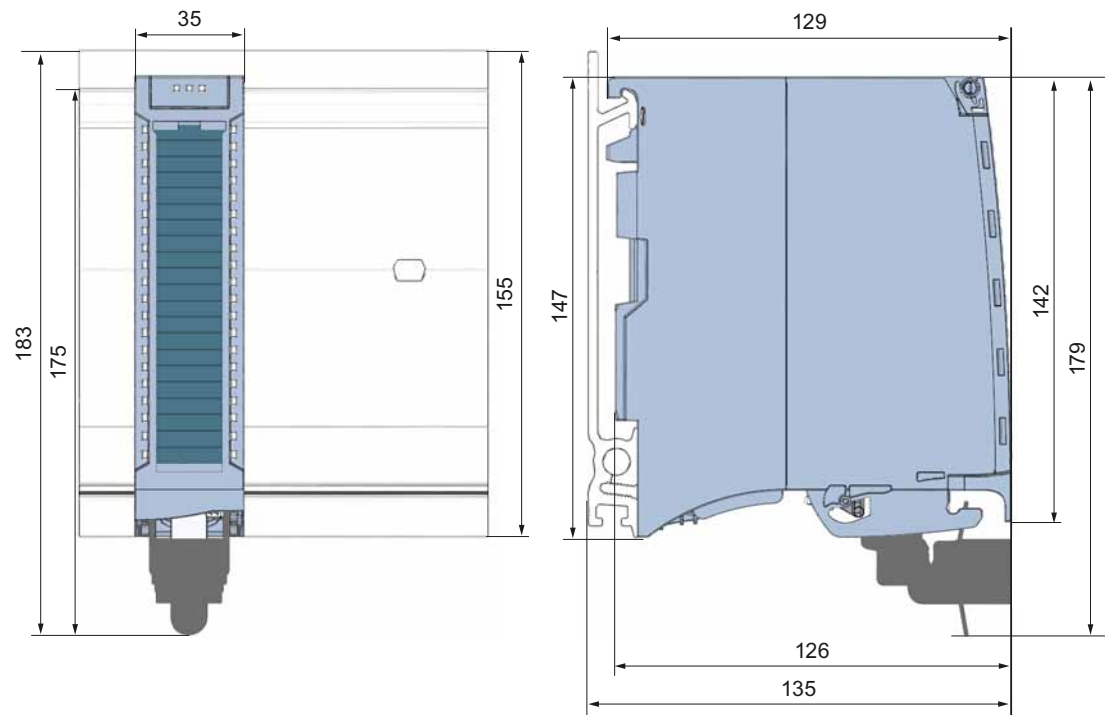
Dimensional drawing of the AQ 4xU/I ST module
